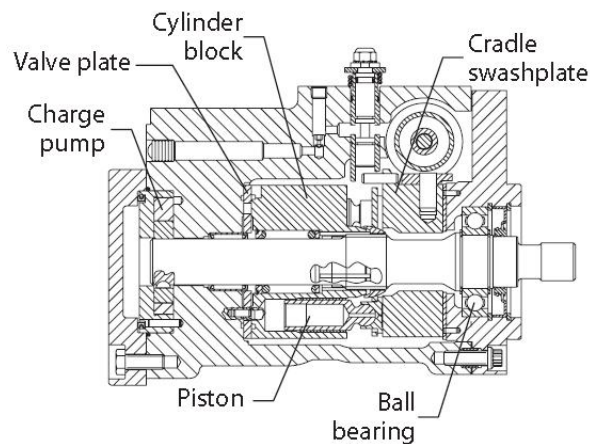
Sauer Danfoss M46 axial piston hydraulic pump.
